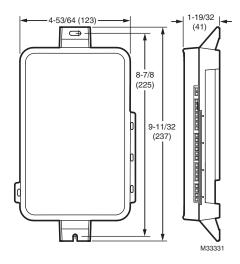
Dimensions of Equipment Interface Module in in. (mm).
